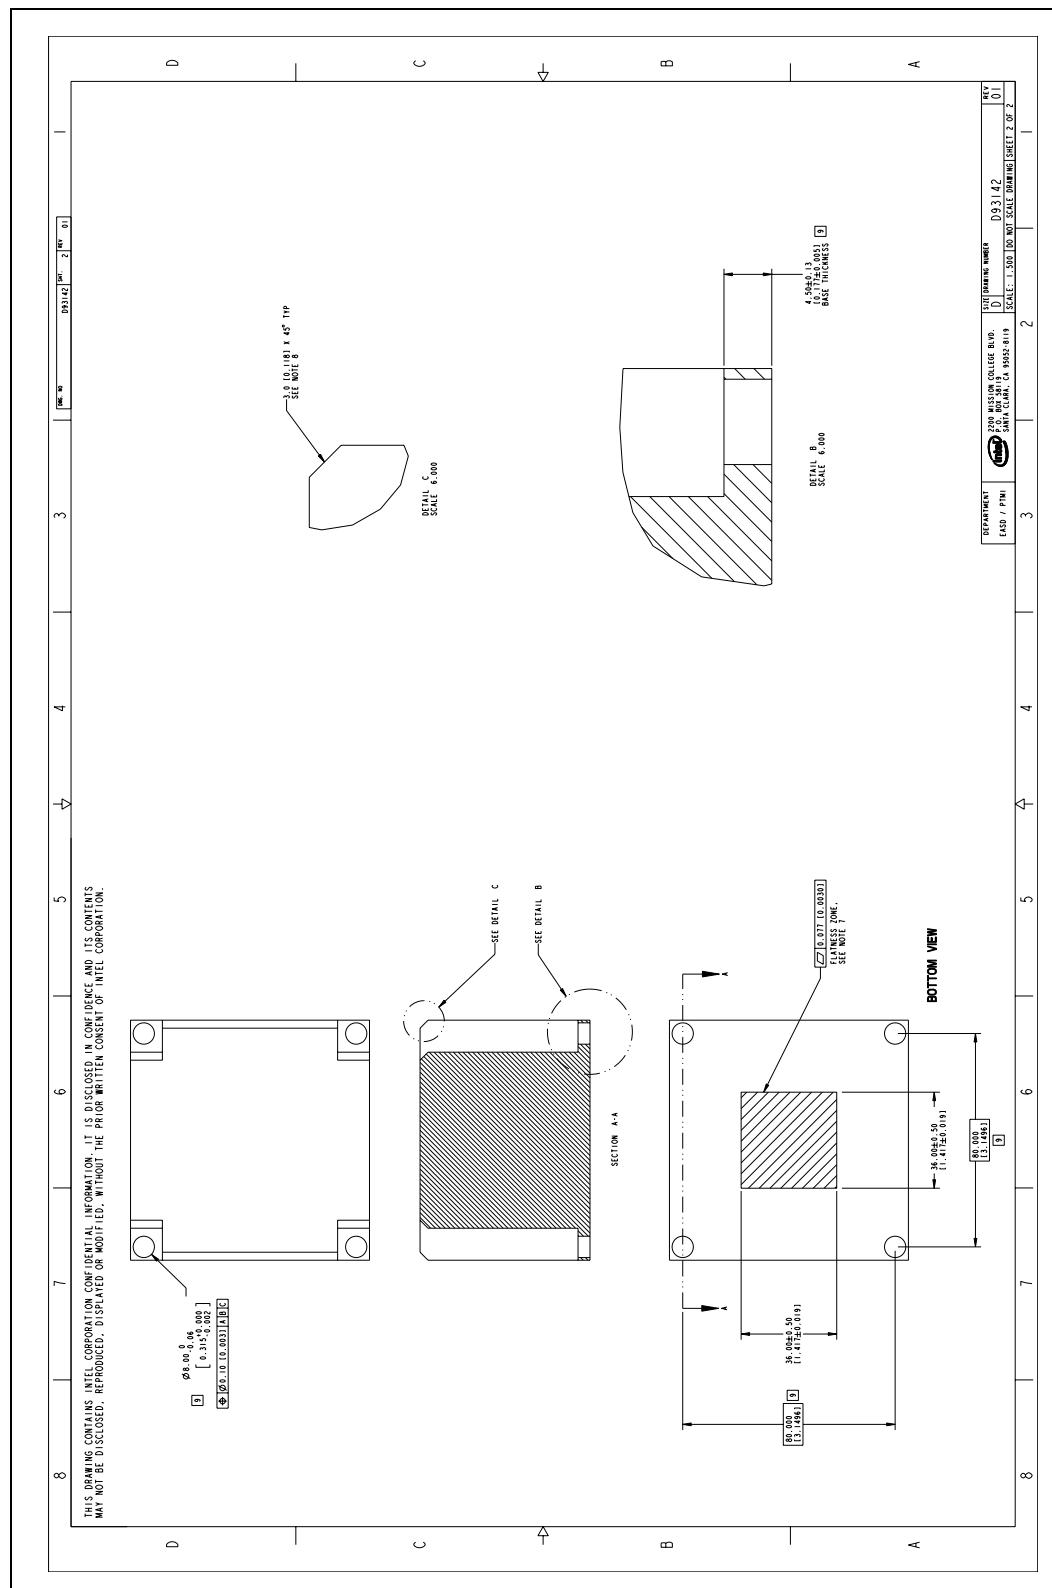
Tower Collaborative Heatsink Assembly (Sheet 1 of 2)
